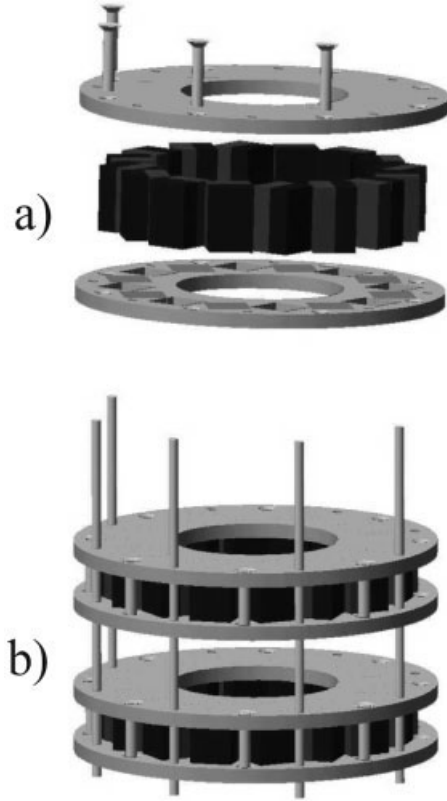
Schematic rendering of the supporting structure. (a) Exploded view of the magnets (dark in the center) being mounted between a top and bottom support ring and fixed by bolts. (b) Assembly of two “sandwich” subunits from (a) to a stacked magnet using threaded rods resulting in a separation of 0.6 mm between the magnets in adjacent stacks.
